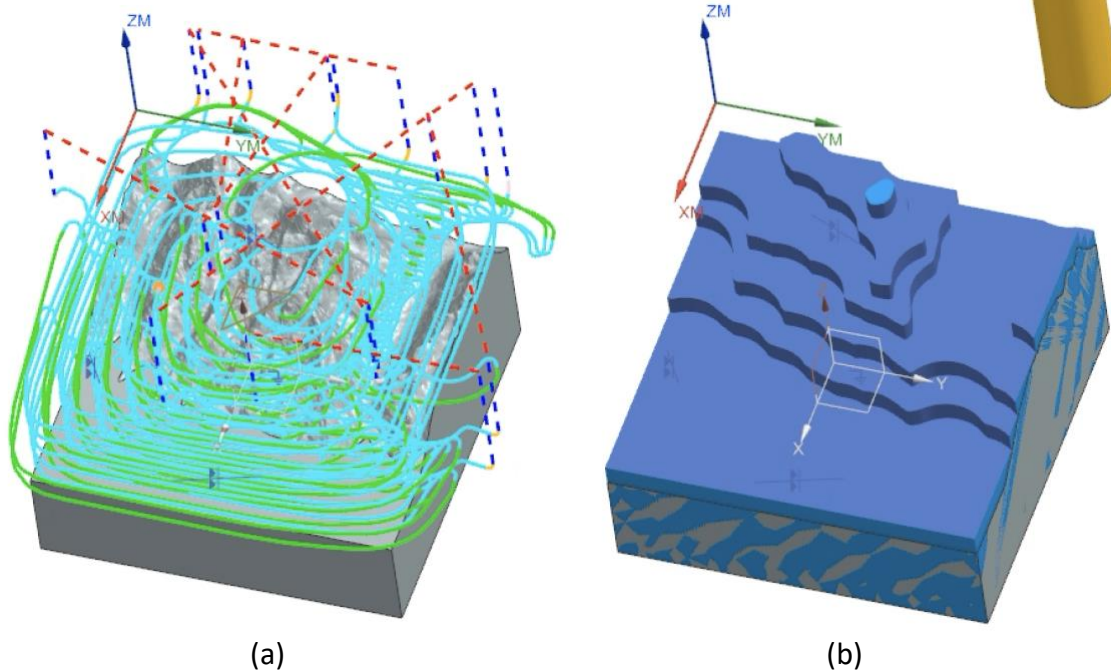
Roughing 1 – Adaptive Milling  $\frac{3}{4}$ " endmill (a) tool path and (b) IPW.
